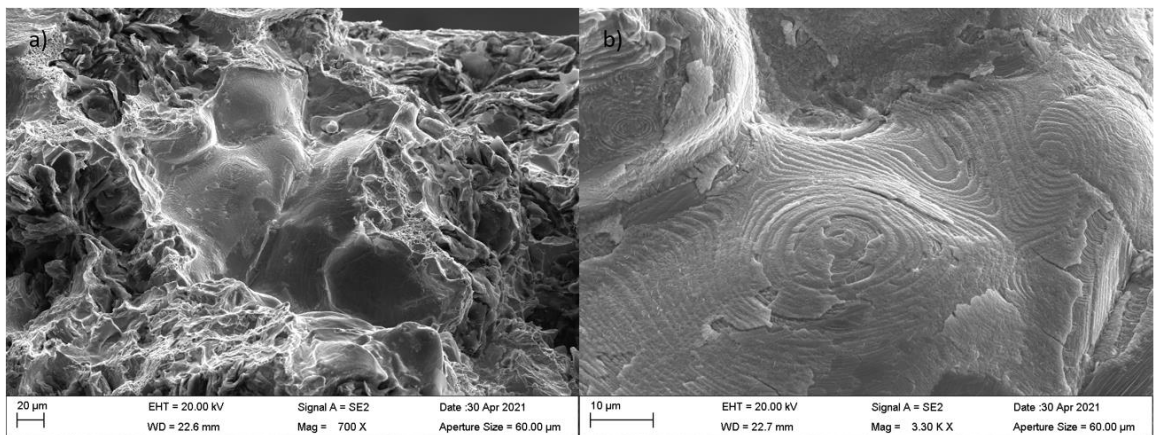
Fracture surface of specimen 1. a) General view of the fracture surface showing large cavities around the graphite nodules. b) Closeup from another part of the fracture surface showing small dimples in the ferritic ligament
